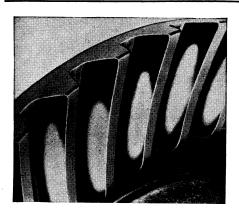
Proper tooth contact. The tooth bearing, both lengthwise and profile should appear as shown
